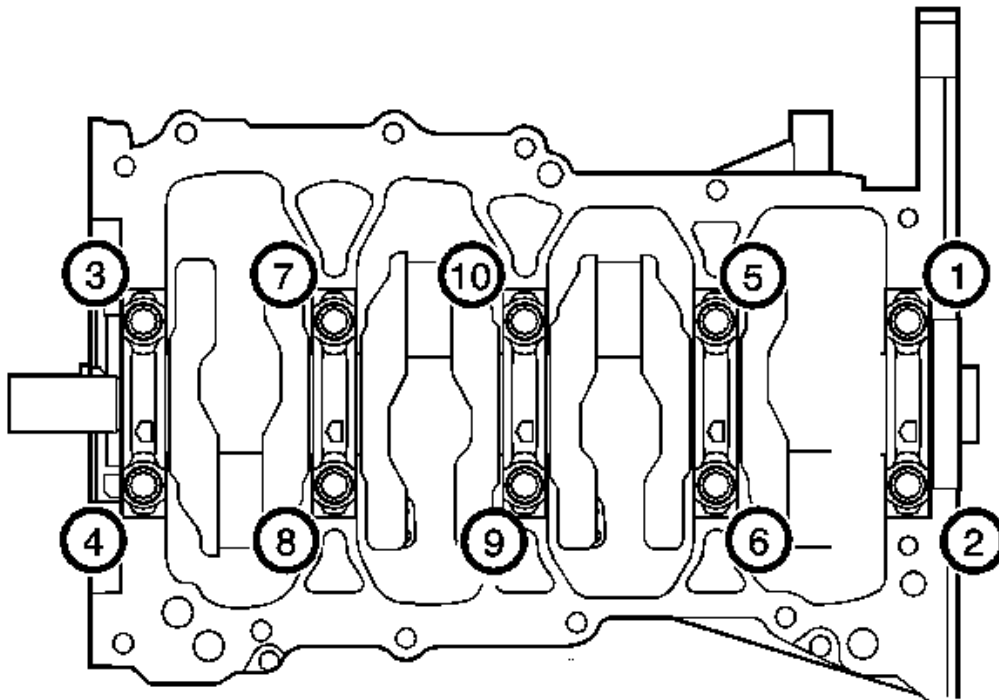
Identifying Main Bearing Cap Bolt Removal Sequence
